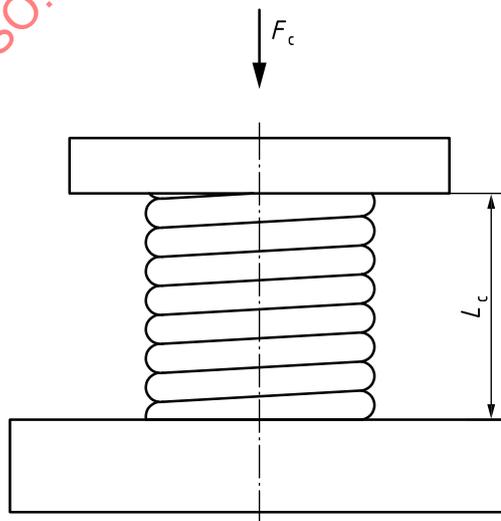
Method of testing the solid length ( $L_c$ ) with a spring load tester (example)
